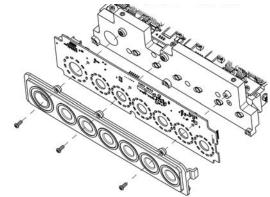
Front Screws Securing Front Cover to Manifold Assembly
